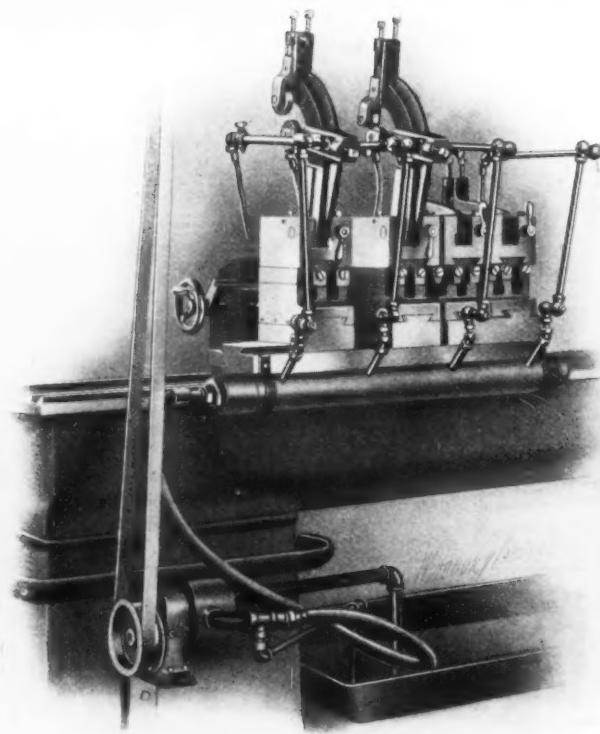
A Rear View of the Tool Carrier, Showing the Tool Lubricating System.
